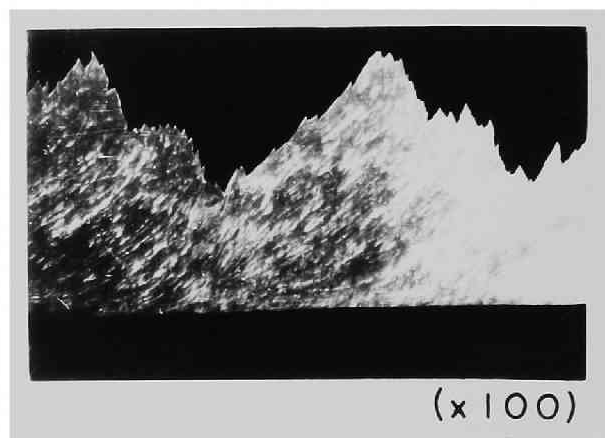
Photograph of a chip with serrated appearance at the back side [Work material, 0.43% carbon steel; tool material, carbide S1(WC-TiC-Co); rake angle, -40 deg; clearance angle, 6 deg; width of cut, 3.0 mm; depth of cut, 0.10 mm; cutting speed, 70 m/min ; dry]
